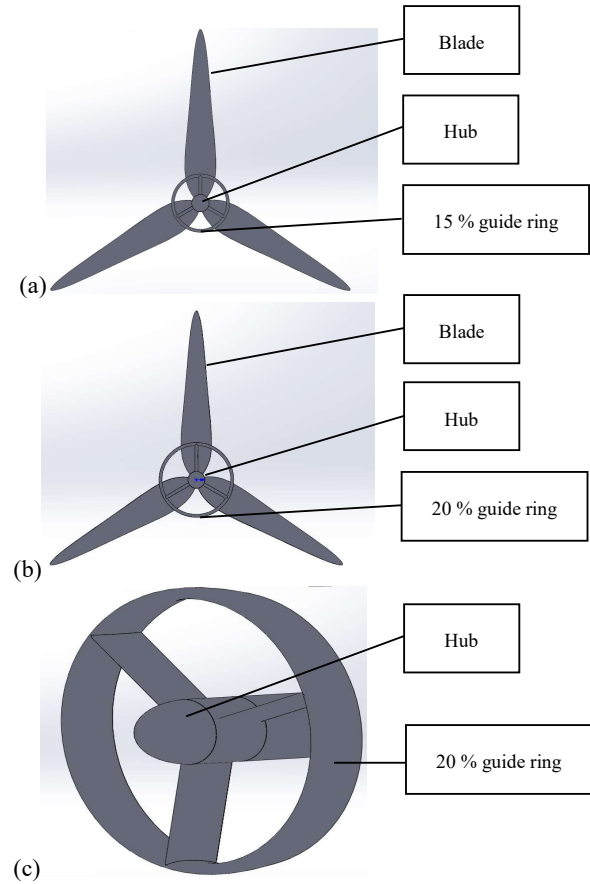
Rotor with 15 % guide ring (a), 20 % guide ring (b) and close-up view of 20 % guide ring (c).
